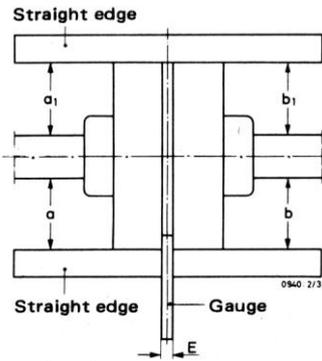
Aligning the coupling by means of a straight edge and gauge
